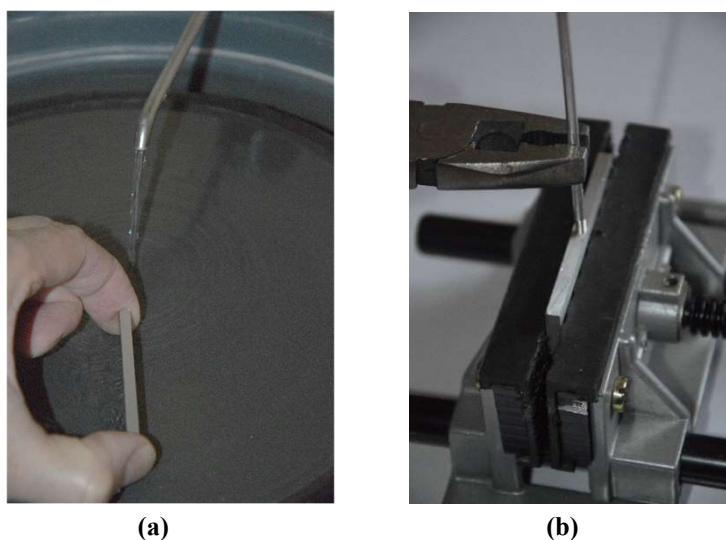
Grinding of the surface plate (a), connecting of plate and rod (b)
